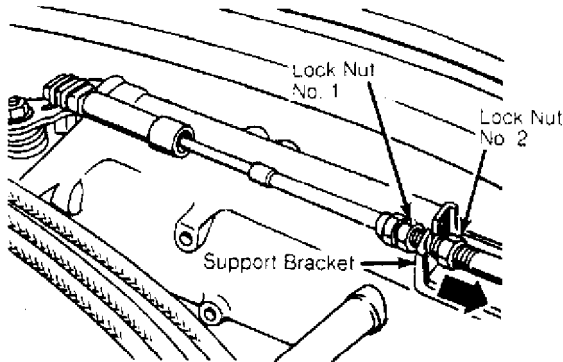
Adjusting Throttle Cable (All Except Quantum & Vanagon)
